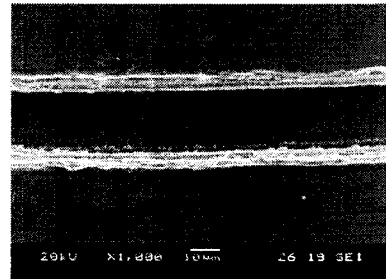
Groove machined with a 20 μm rectangular tool: 6000 rpm, 5 μm feed, and 2 μm depth of cut
